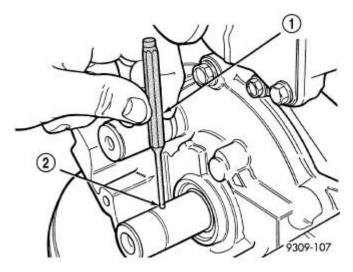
Crankshaft Sprocket Dowel Pin-Removal/Installation Courtesy of CHRYSLER LLC
